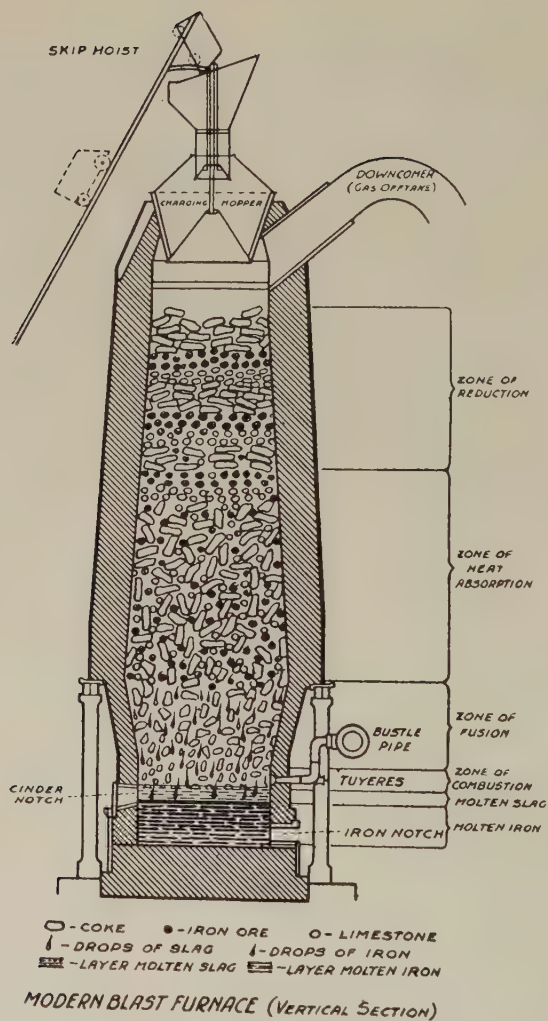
Cross Section of a Blast Furnace.—Courtesy of Heat Treating and Forging.
